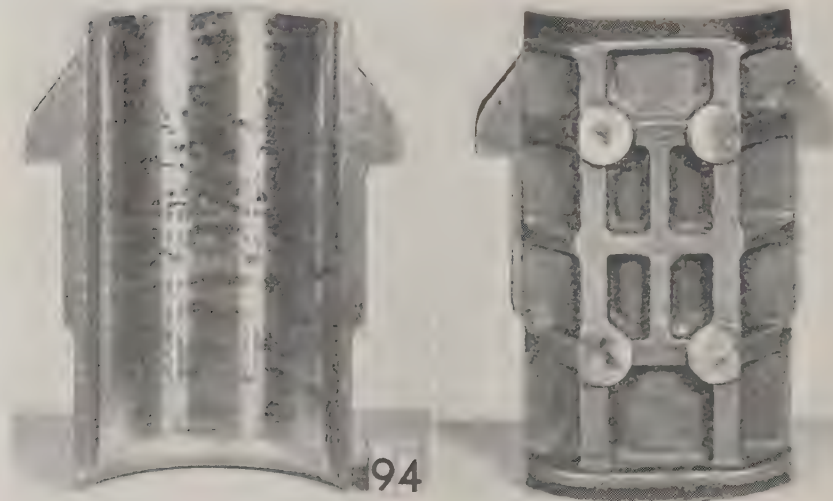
KINGSBURY FLEXIBLE-BACK BEARING 94
